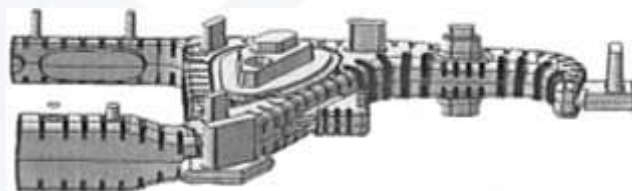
Diagram of reinforcement of edge reinforcement due to execution of bracket-shaped corner ribs
